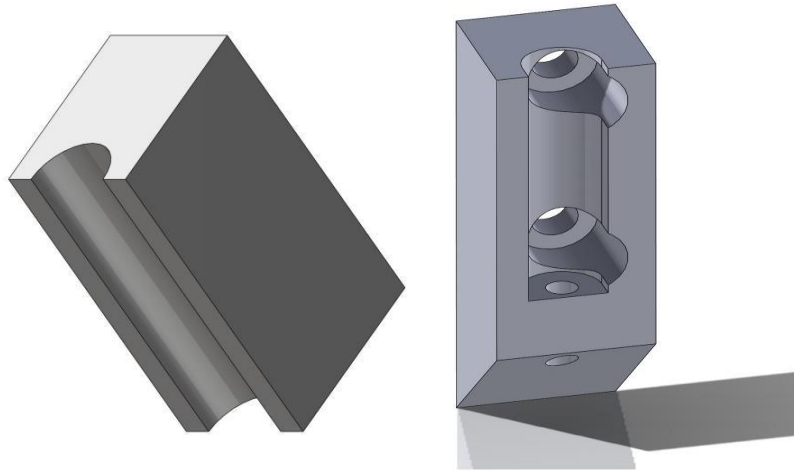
Left) 8mm rod mounting, Right) 5mm rod mounting
